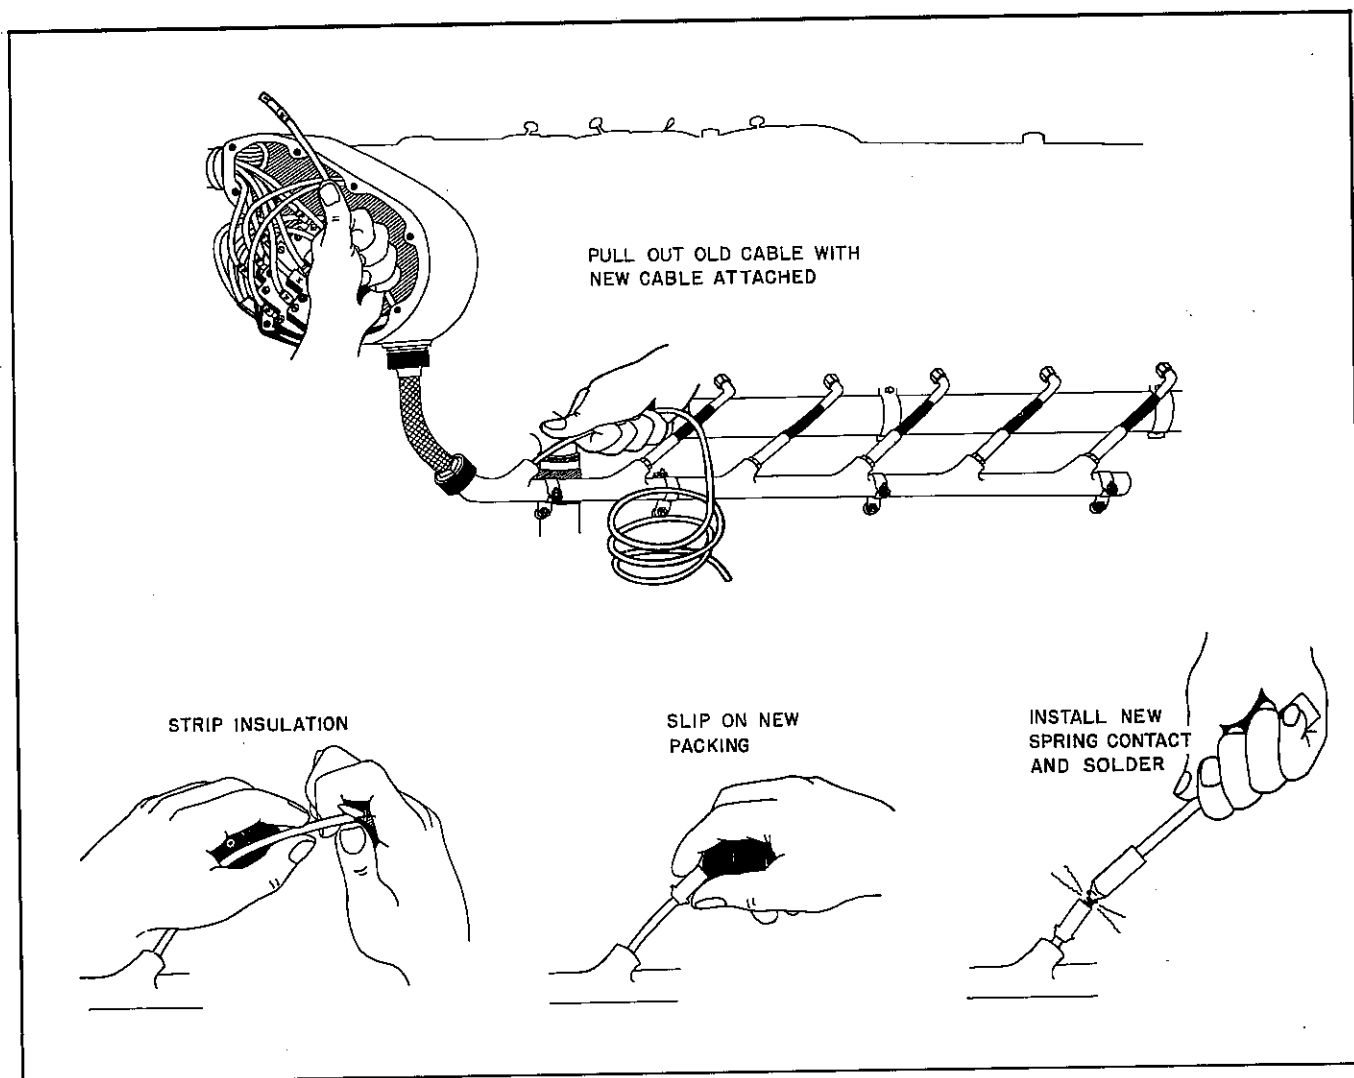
Installing Replacement Exhaust Ignition Tube Cable.
